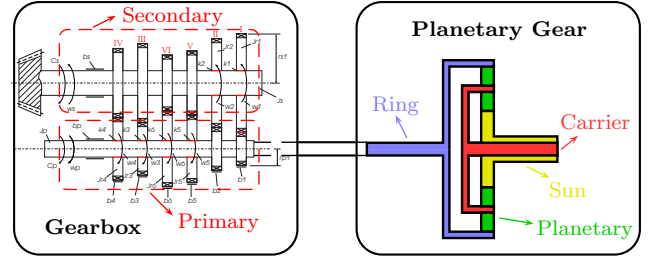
Gearbox with primary shaft rigidly connected to the ring of a planetary gear.
